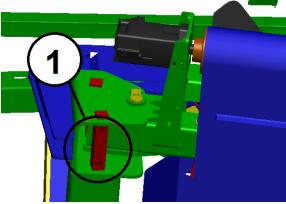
Upper Stop Bolt Location Key 1 – Bottom of Frame at Stop Bar
